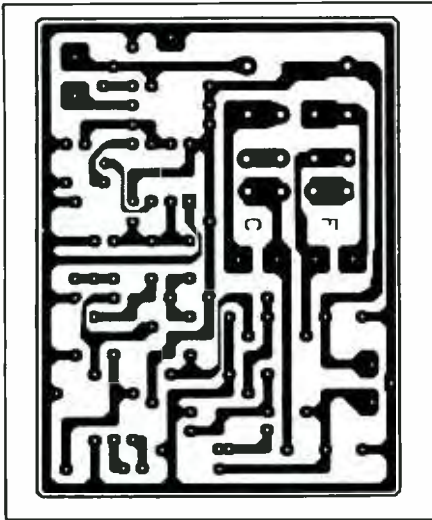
Actual-size etching-and-drilling guide for project's printed-circuit board.
